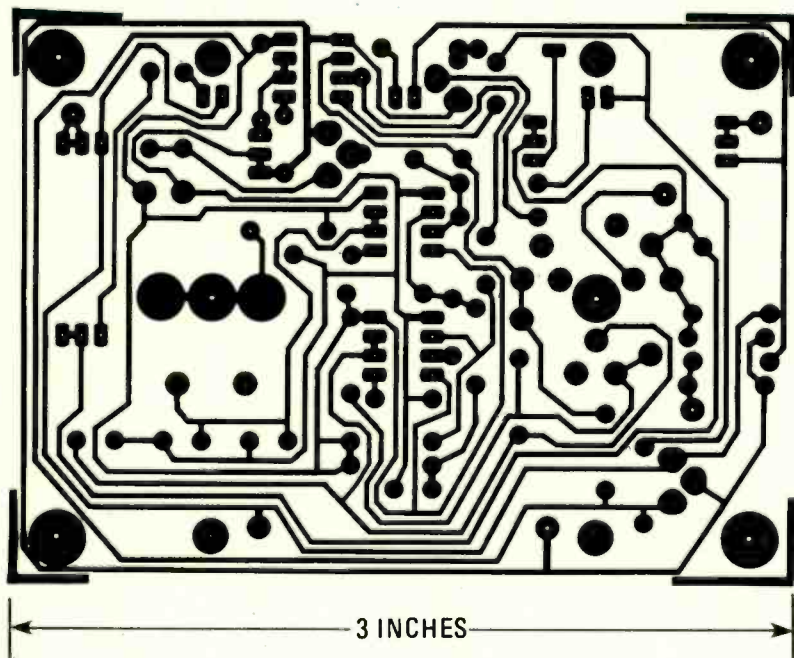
FOIL PATTERN for a single-sided board is shown full size.
